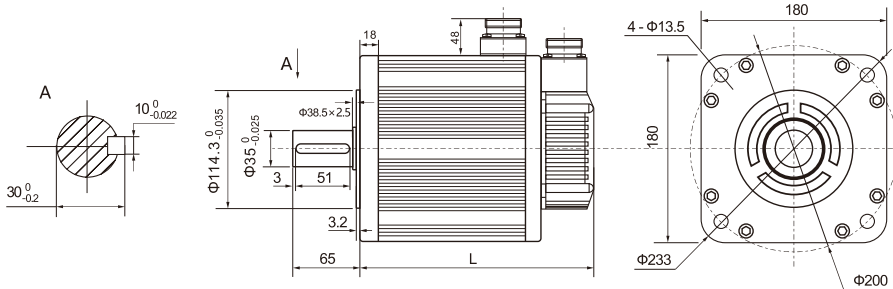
Motor dimension of 3.0kW/5.5 kW/7.5 kW
